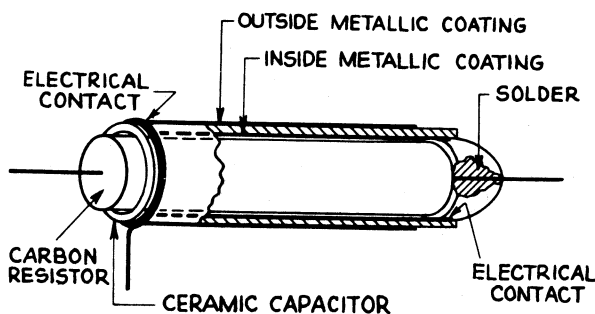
Enlarged isometric cross-section of the *R36-C52* unit.
